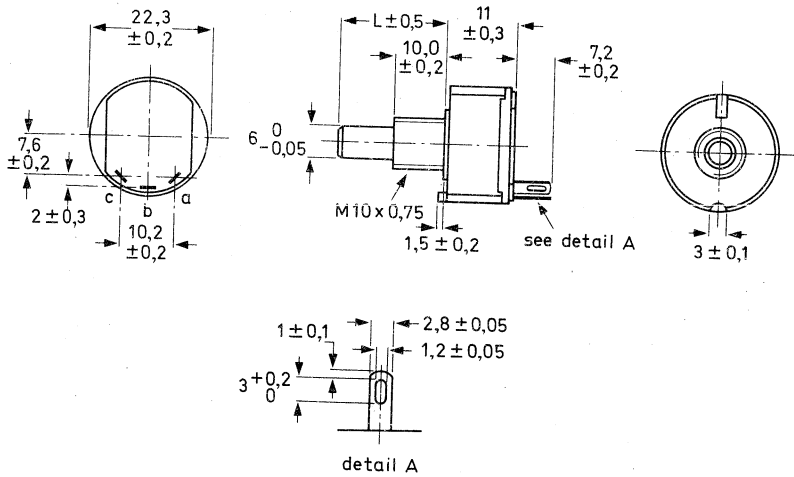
Potentiometer with plain spindle; spindle length L is 17 mm, 20 mm, 30 mm or 60 mm.
